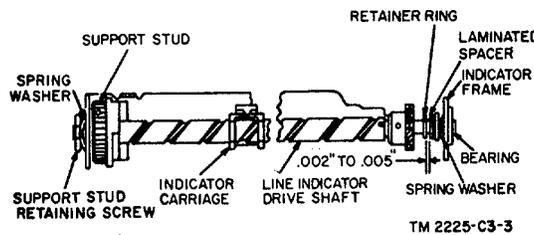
Line indicator adjustments (TT-76B/GGC and later models).
